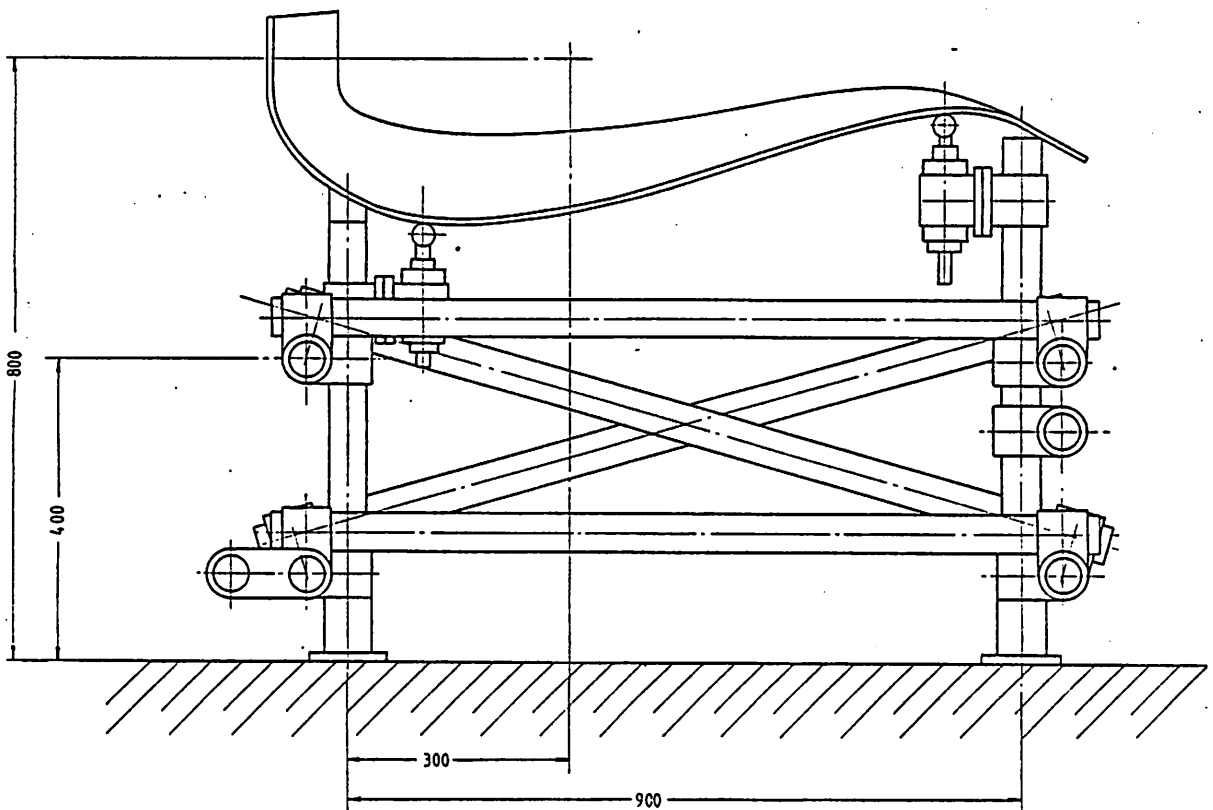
CROSS-SECTION OF THE WEC MOULD
